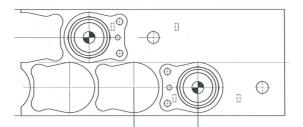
Strip layout sketch of 2 cavity seat recliner
